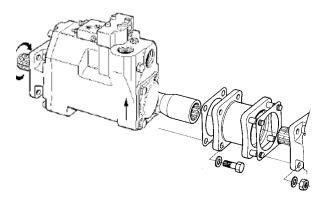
Adaptor kit (P/N 379 7795) for tandem coupling.
